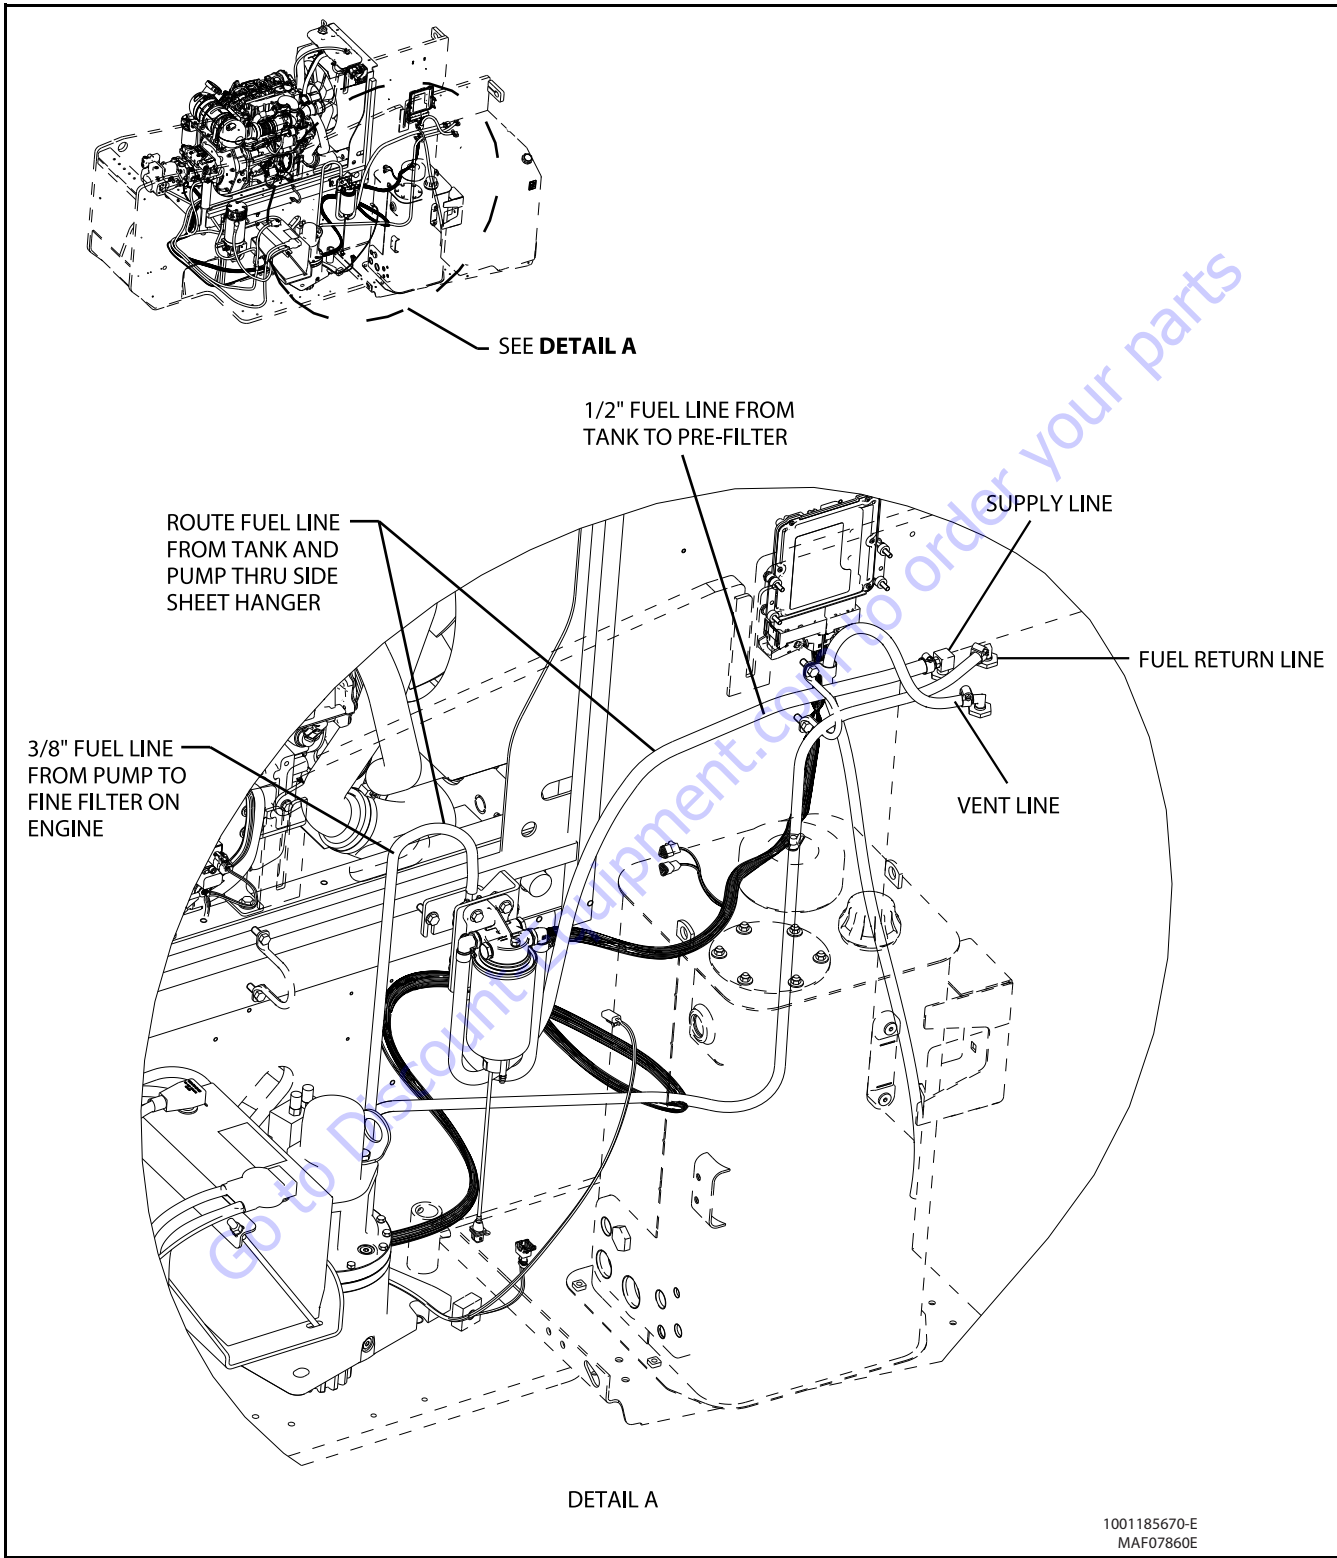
Deutz TD2.9L4 Engine Installation (800A) - Sheet 1 of 8
